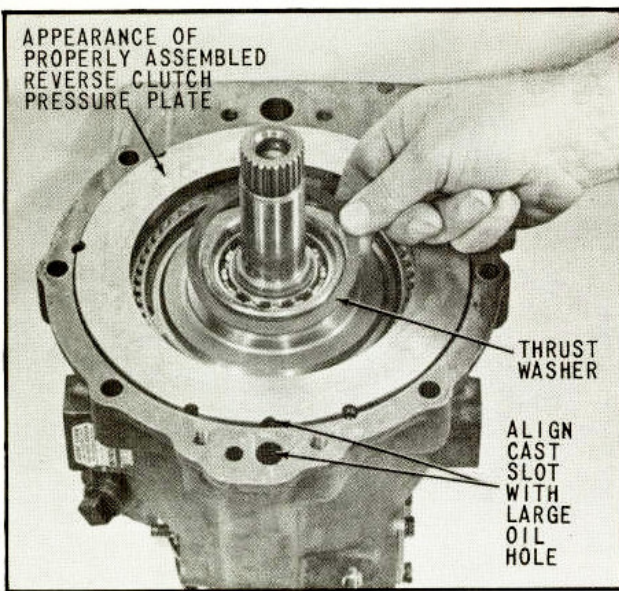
Installing Thrust Washer and Reverse Clutch Pressure Plate
